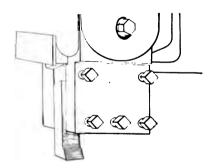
FINISHING TOOL SET FOR FACING CUTS
